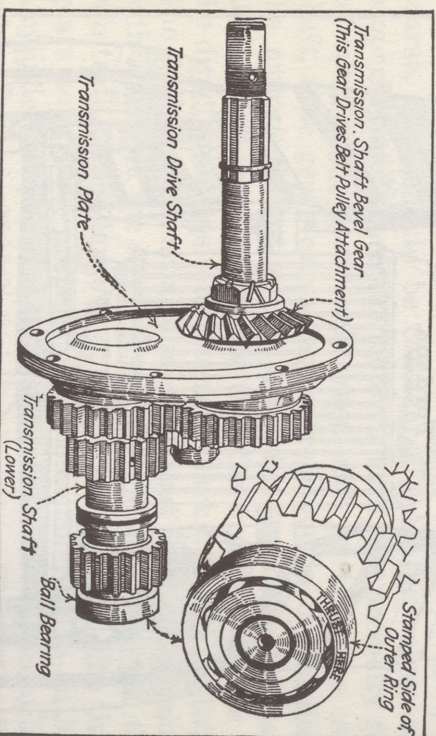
Transmission Plate and Gear Shaft Assembly Removed from the Fordson Tractor. Inset Shows Method of Installing Ball Bearings if These are Removed from Gear Shaft.
